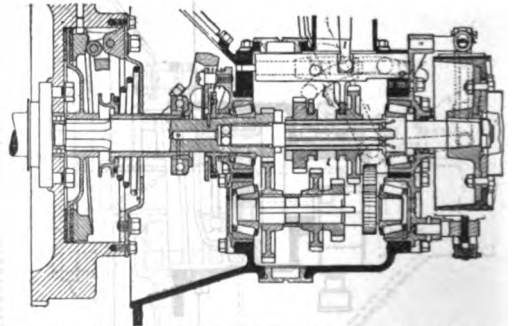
Typical 3-speed gearset (with one-plate clutch in front and transmission brake at the rear). Operating levers, at top, shown in part only.
